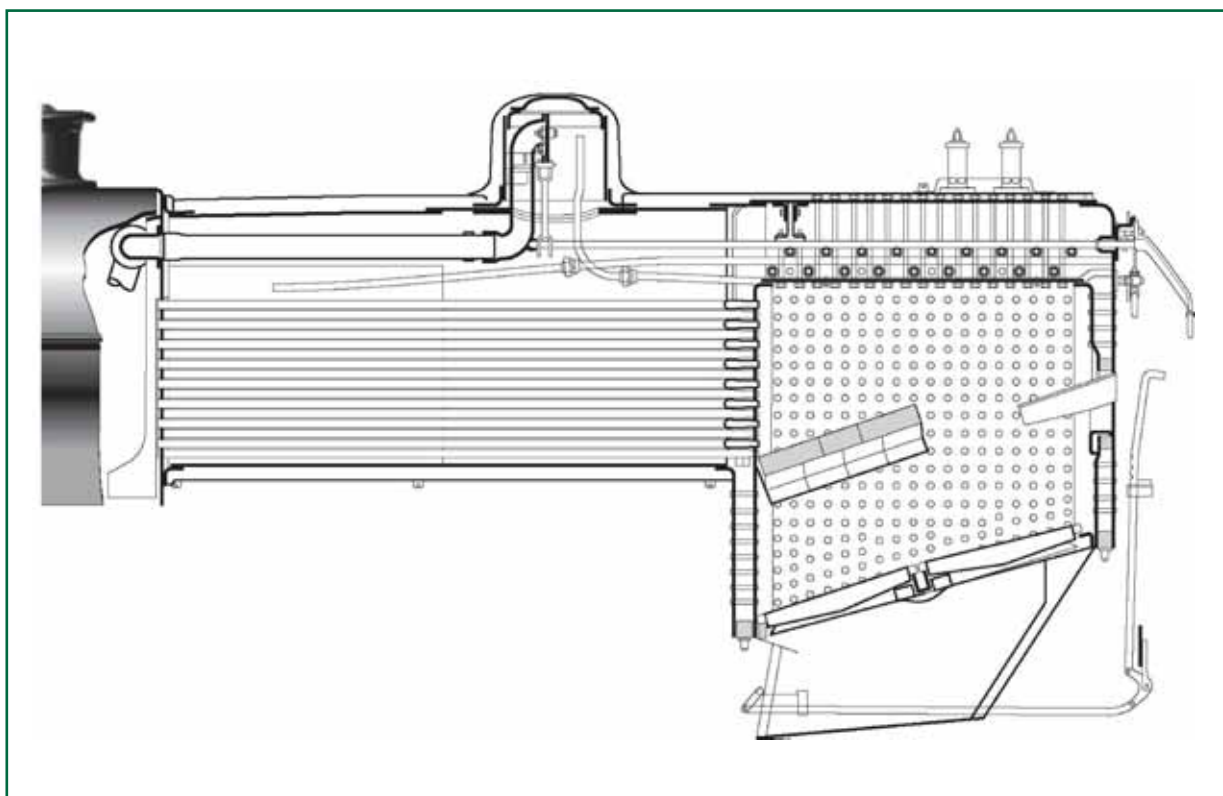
Diagram showing section through main line steam locomotive boiler (from ORR Railway Safety Publication 6, 'The Management of Steam Locomotive Boilers')
